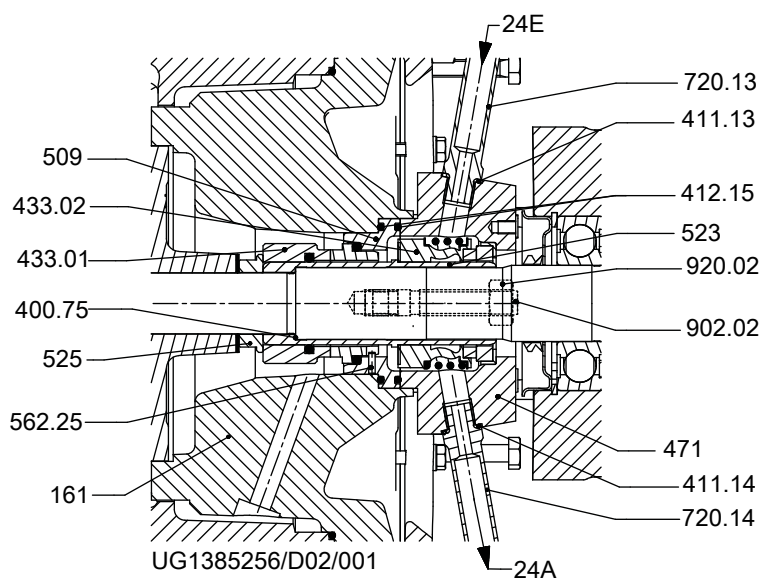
Model with double mechanical seal in tandem arrangement (SU 25/35)
